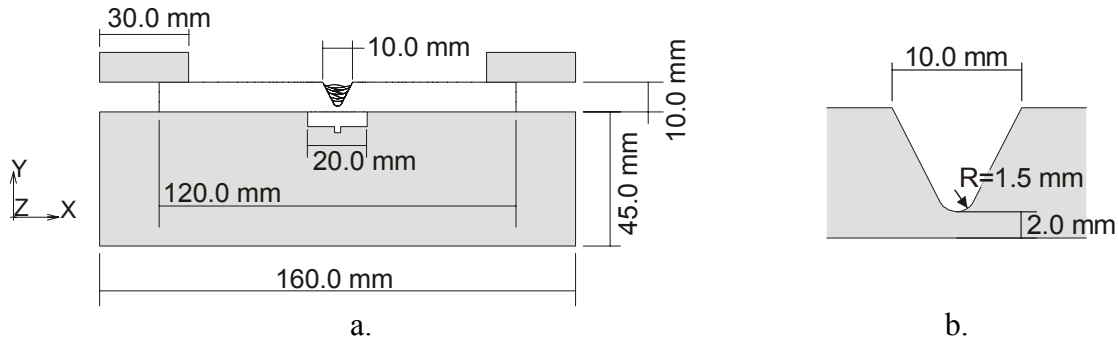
Schematic illustration of the clamp, the plate (a.) and the weld groove and their dimensions.
